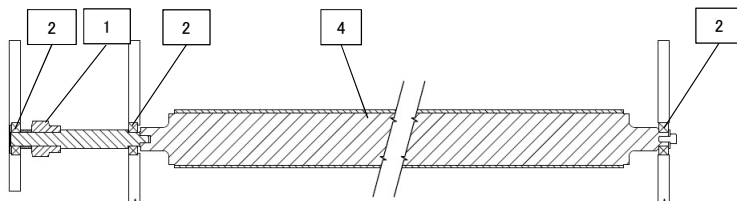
Input Conveyor Unit - Conveyor roll detail ]
